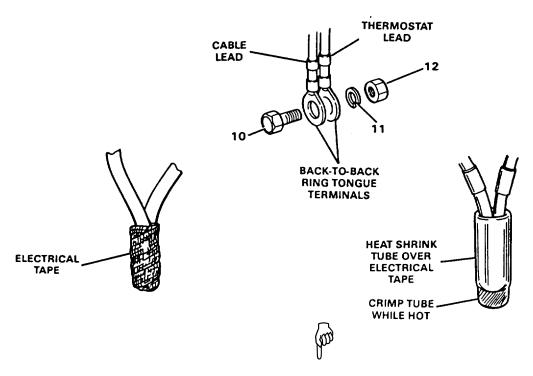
Thermostats (Sheet 3 of 3) Components
